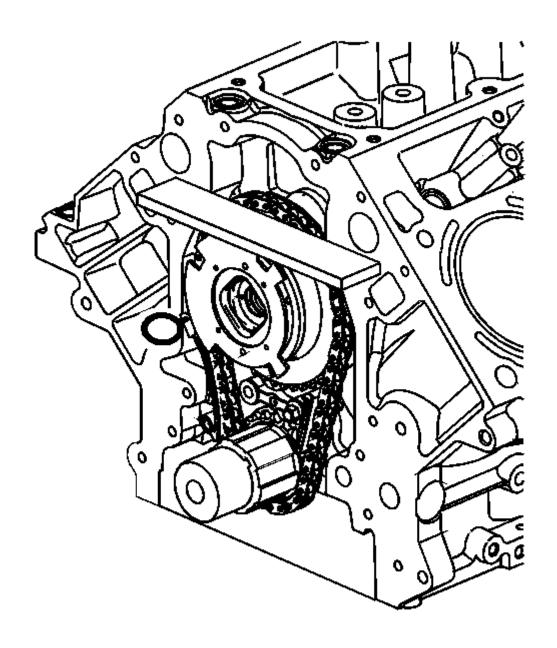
Inspecting For Proper Installation Of CMP Actuator & Timing Chain Courtesy of GENERAL MOTORS CORP.
